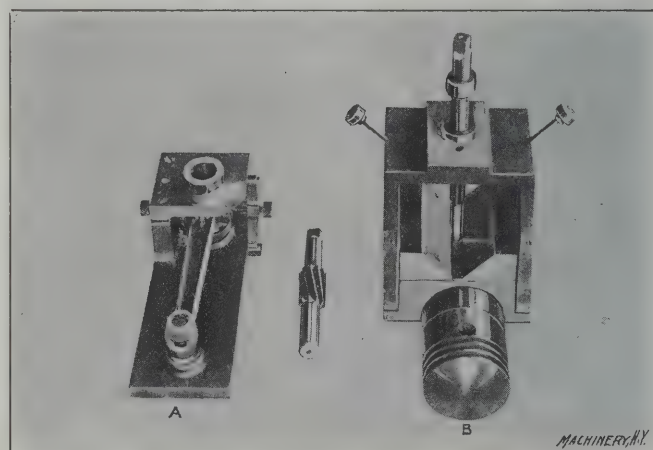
Reaming Jigs for the Crank End of the Connecting-rod, and the Wrist-pin Hole in the Piston
